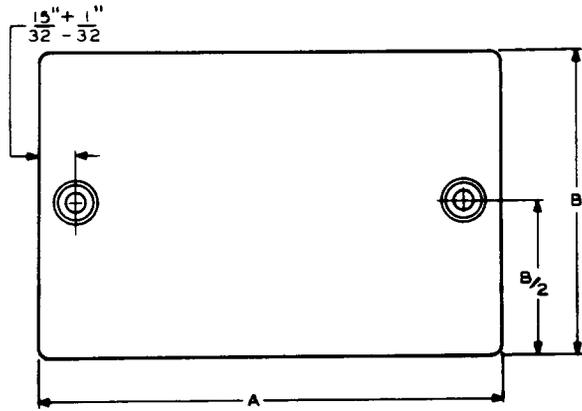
Bulletin Holder KS-5645, Lists 100 to 119 (See Table A)
